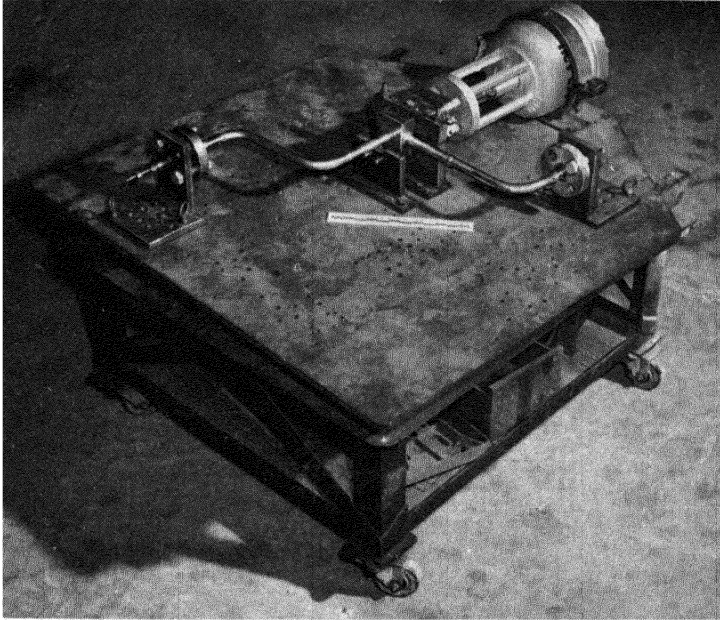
Universal jig for locating flange positions on HRE-2 replacement high-pressure valves.
